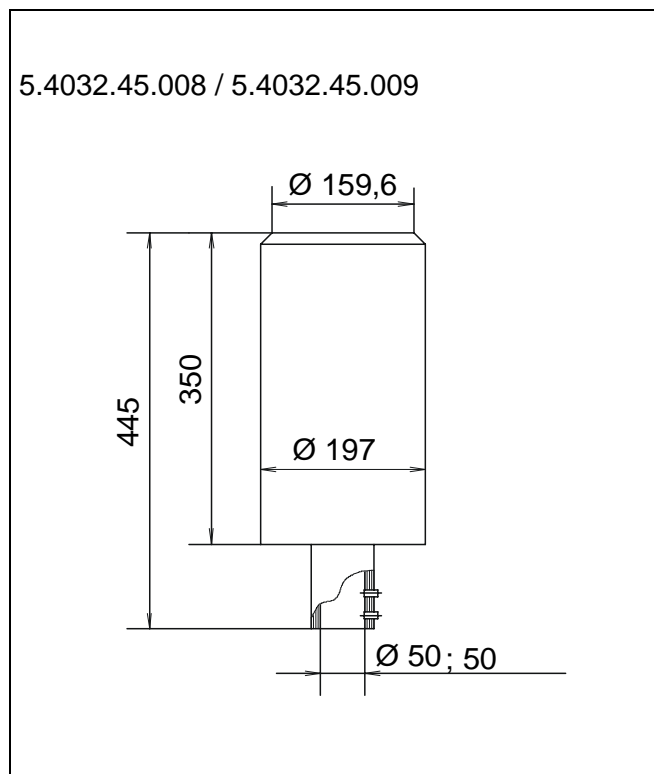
Dim. drawing Precipitation transmitter with casing heating
